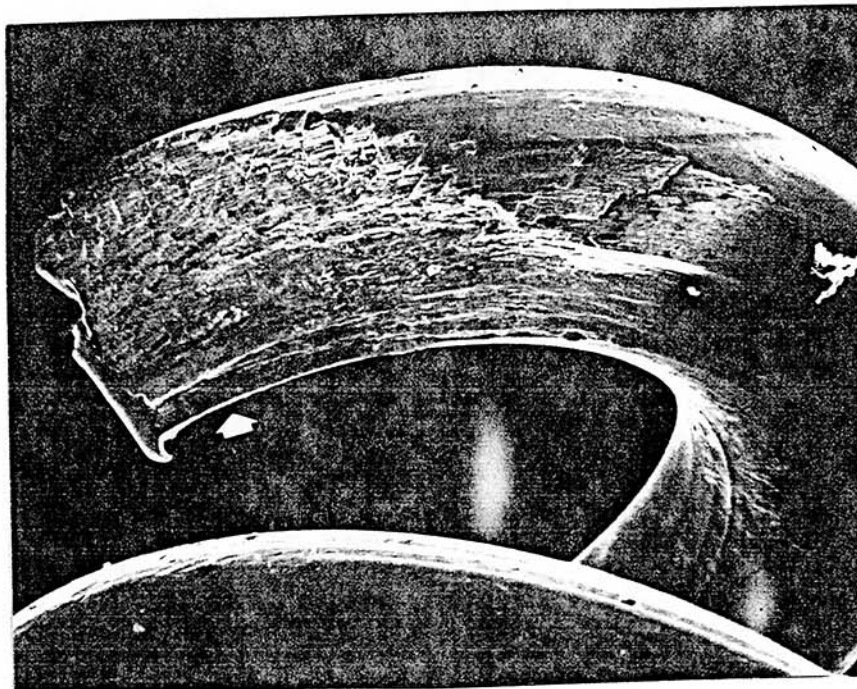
Closeup of the extractor spring fracture surface. Fracture initiated along the inner edge of the spring coil in the area identified by the arrow. Magnification, 80X.
